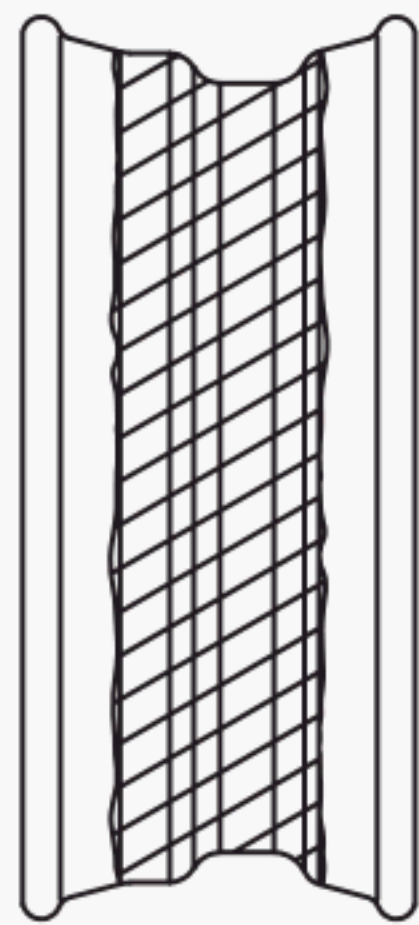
Excessive corrosion on tyre side of rim and gutter area
